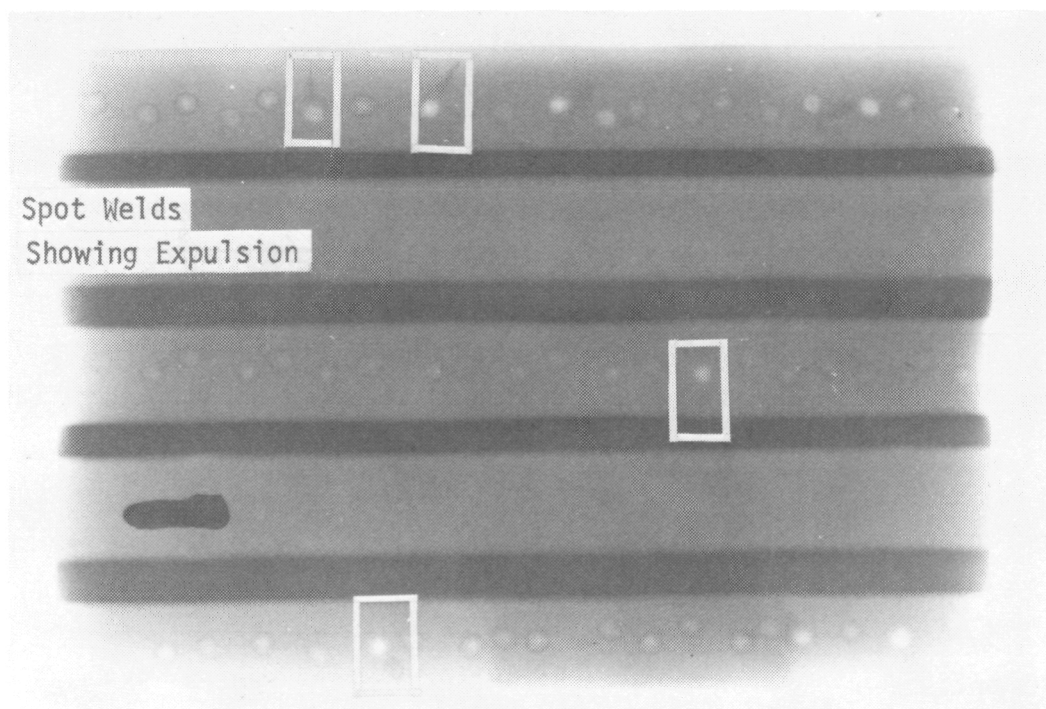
X-ray of Spot-Welded Panel
